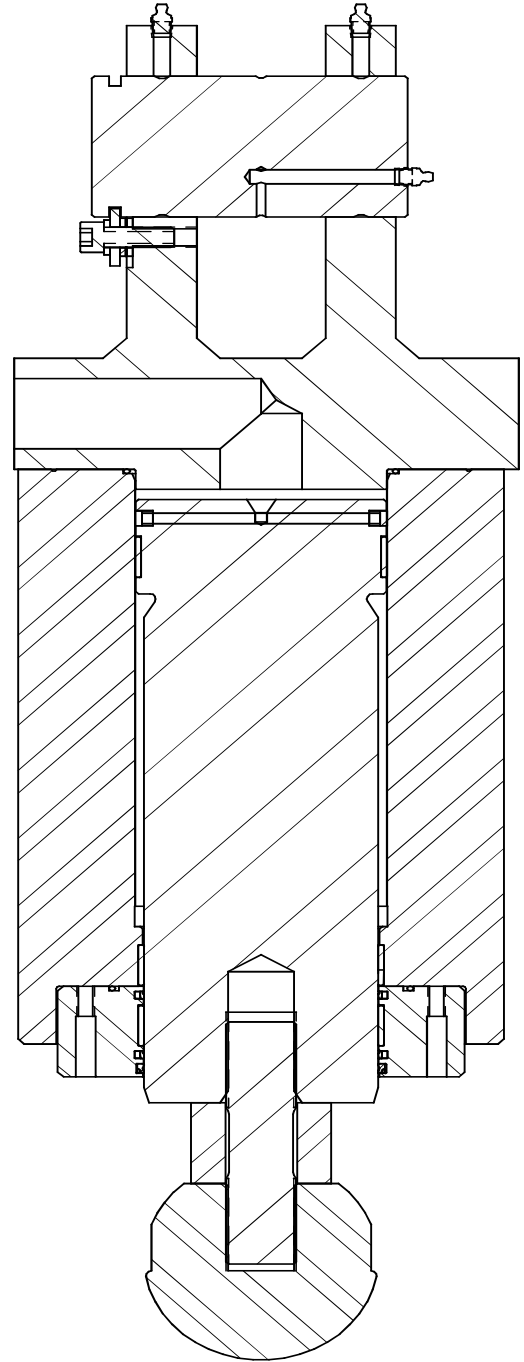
Hydraulic Cylinder (Internal View)
